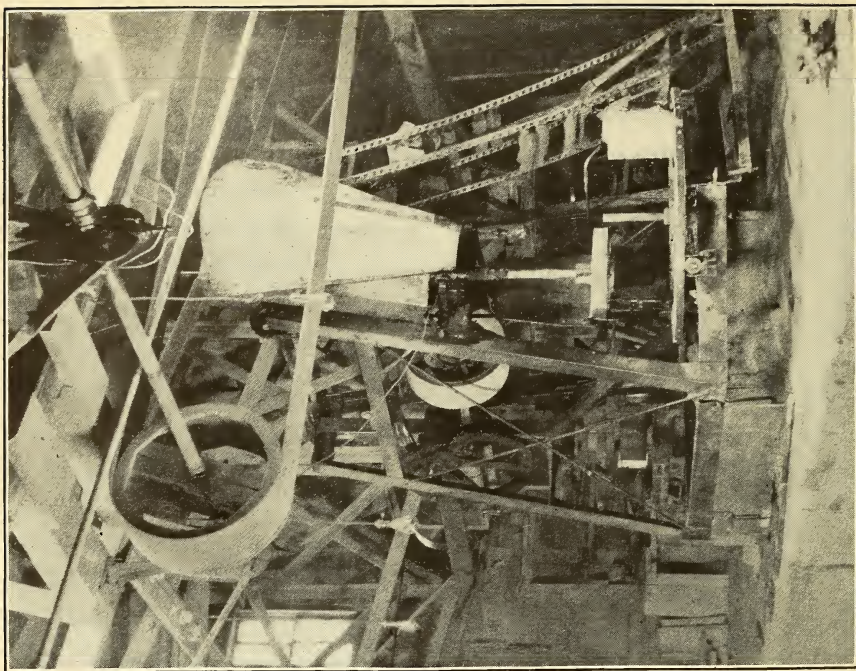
Schenck cement tile machine. When the packer head on the vertical rotating shaft is in its lowest position cement mortar is automatically dumped into the mold by a bucket elevator and the material is packed against the wall of the mold by the rotating packer head as it is withdrawn vertically
